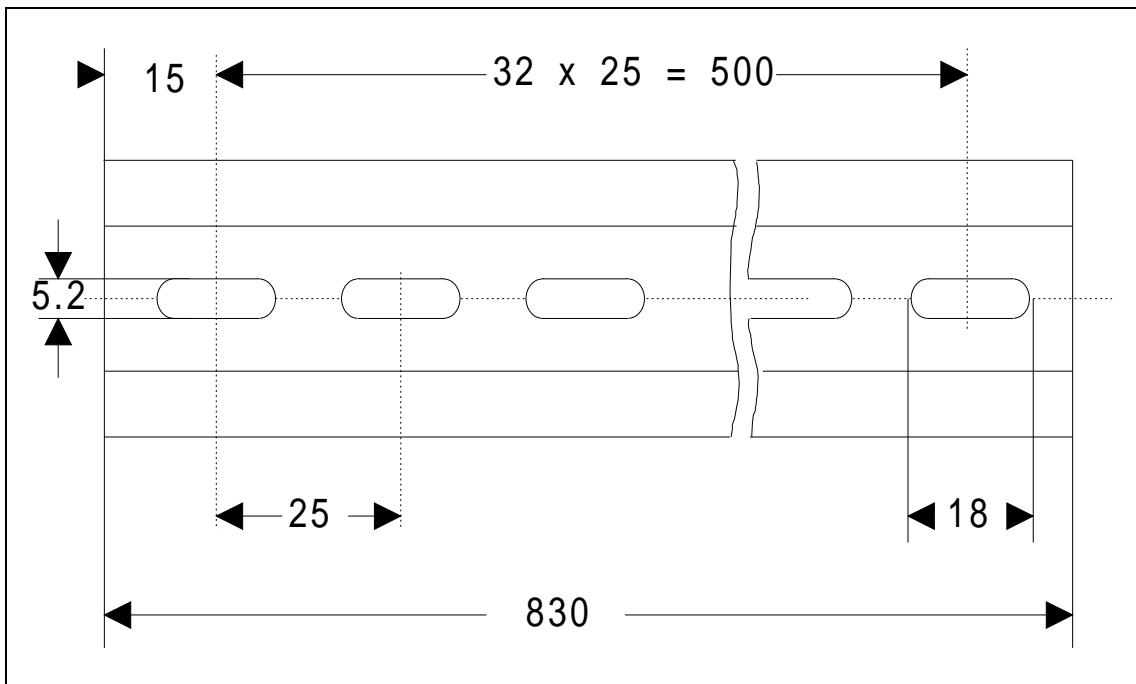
Dimension Drawing of the 830 mm Standard Sectional Rail
